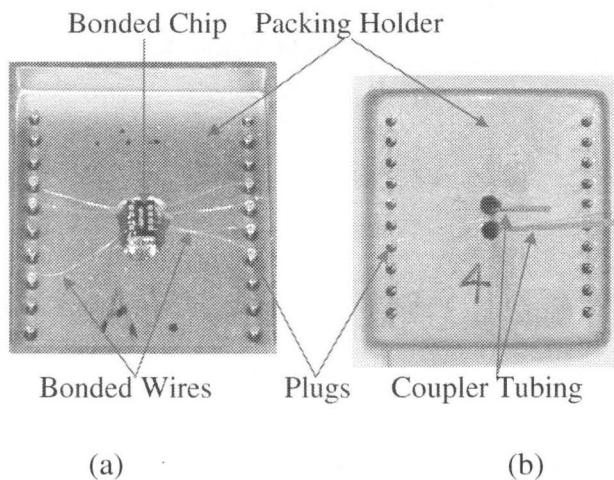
Pictures of the chip packing: (a) top view, (b) bottom view.
